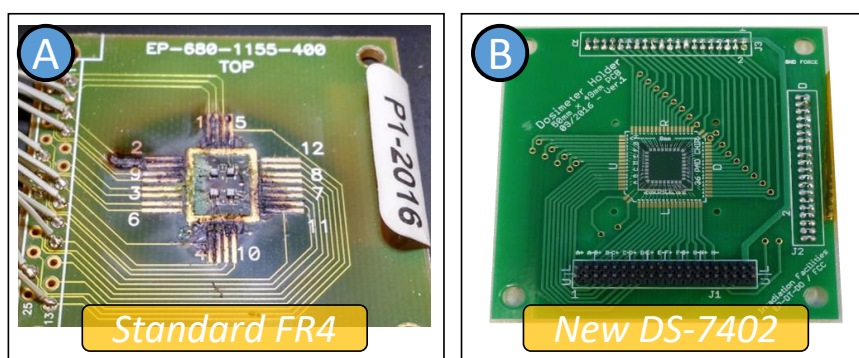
A) Damaged standard FR4 PCB after irradiation test performed in IRRAD at FCC radiation levels. B) New rad-hard Dosimeter Holder PCB produced with a thinner halogen-free DS-7402 substrate with a wire bonded chip.
